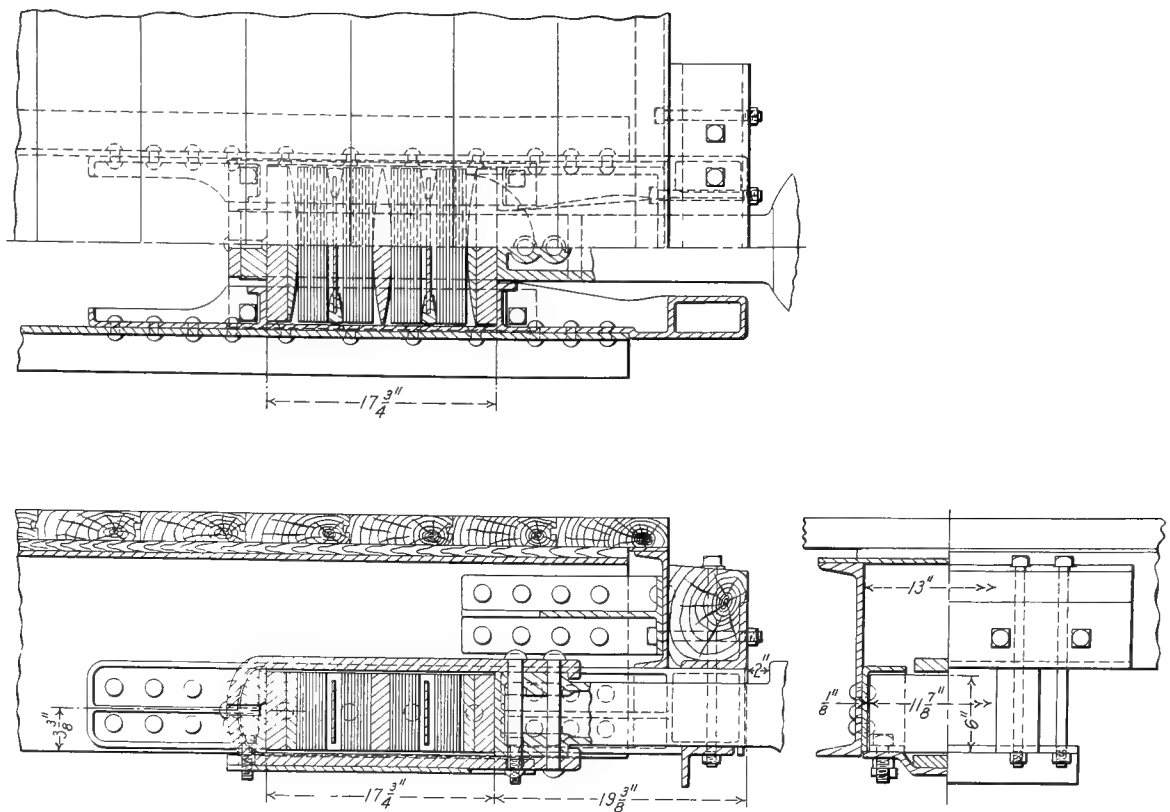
Waugh Draft Gear as Applied to Chicago & North Western Freight Cars.
